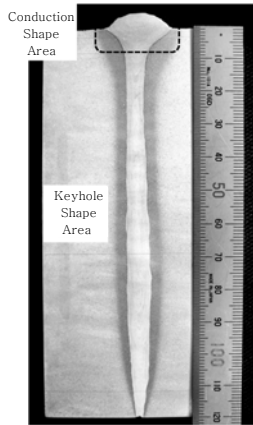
Photograph showing the macro section of the EB weldment
